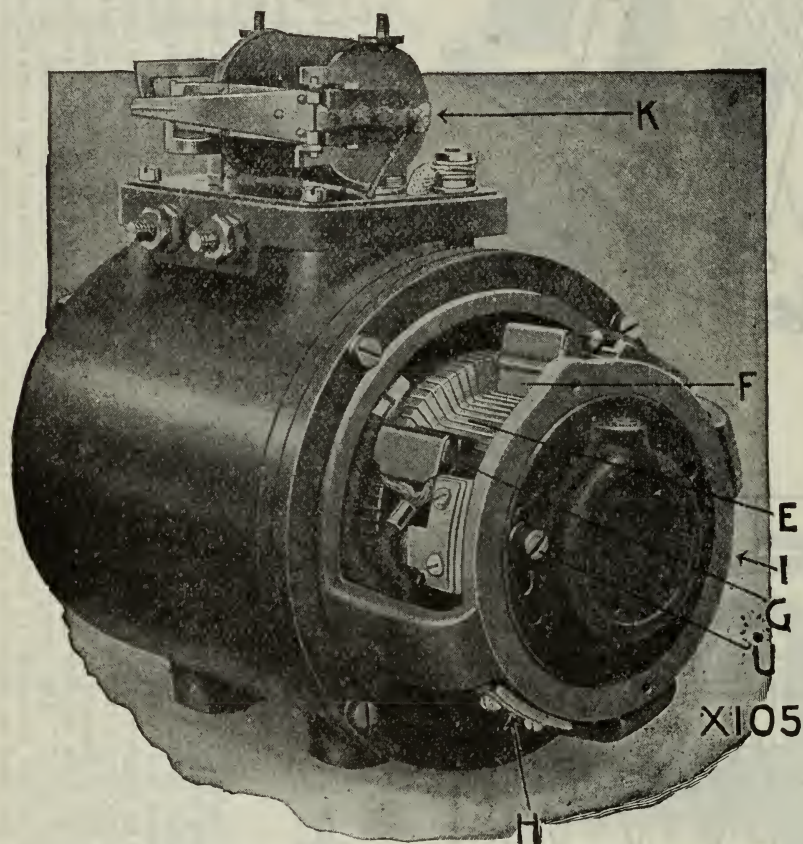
,045.—Wagner dynamo of two unit starting and lighting system. The drive is through a train of gear or equivalent. The windings and internal connections are of such character that no regulating devices are required except a cut out. *In construction*, the commutator E and brushes F, G, H, and I, are located under the cover which in this cut is removed. The brushes H and I collect the current from the commutator and furnish this current for charging the battery through the cut out K. The brushes F and G collect the current from the commutator and furnish this current for exciting the fields. The cut out K is shown in detail in fig. 4,046.
